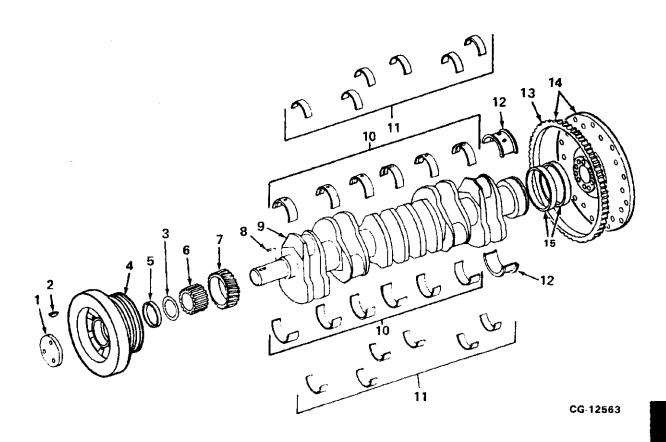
Crankshaft, Bearings, Flywheel and Related Components
